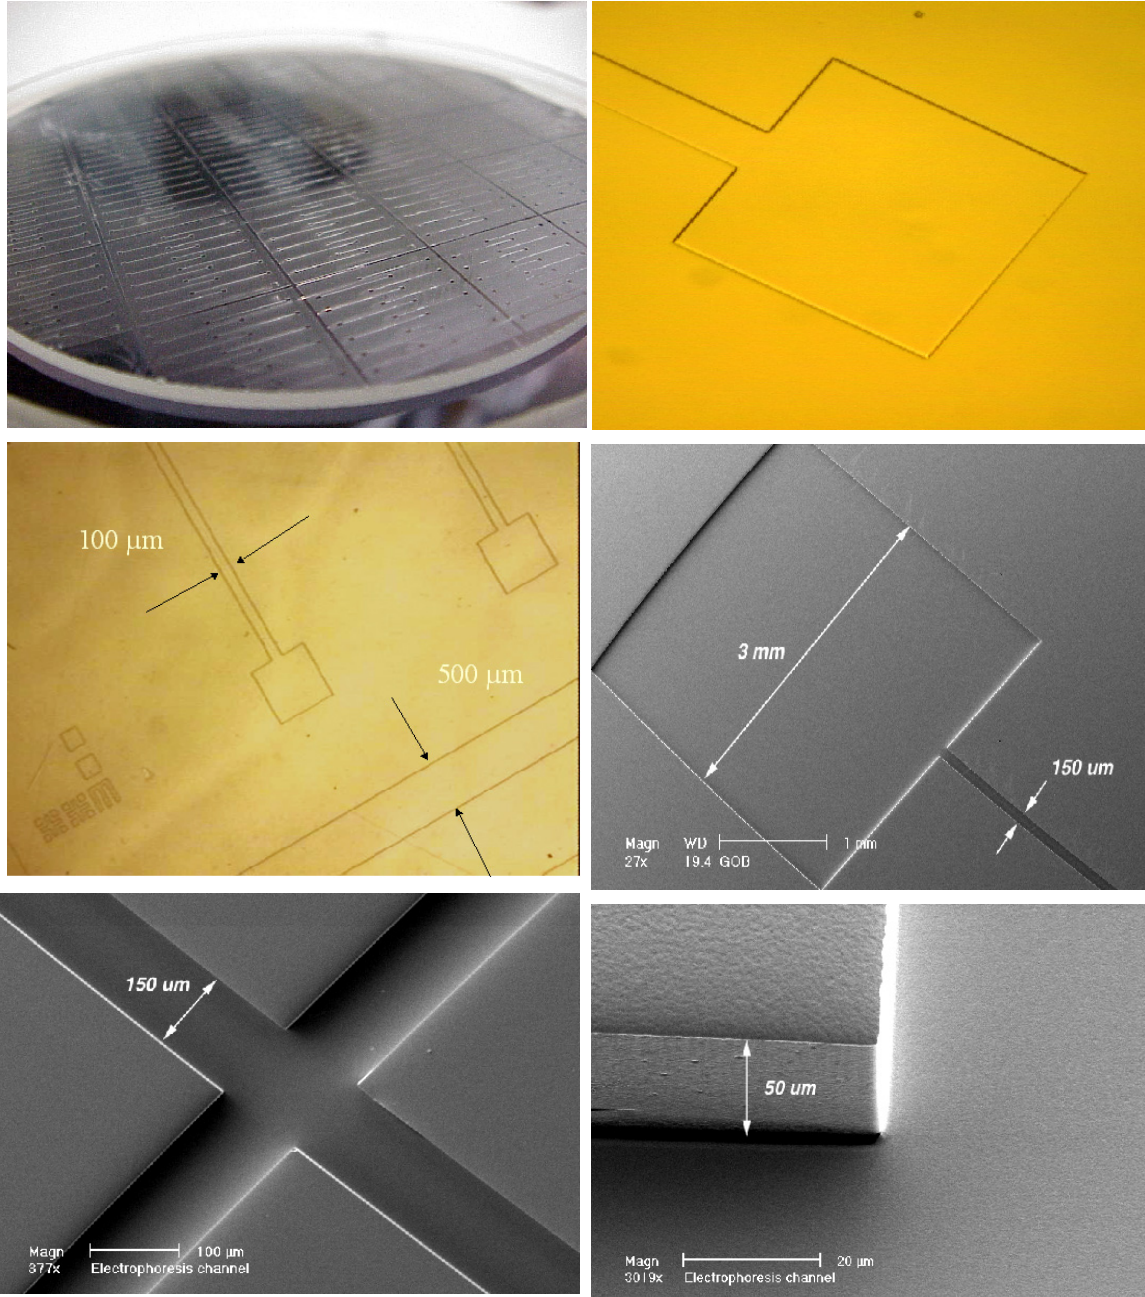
Microscope and SEM pictures of channels fabricated using the closed mold casting process.
